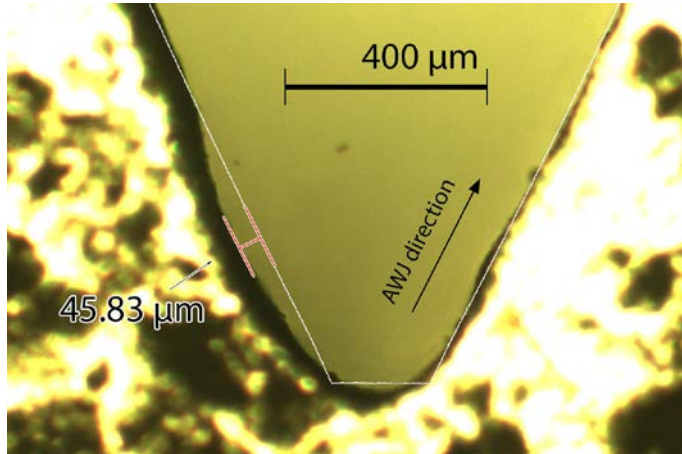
Figure G. Bottom geometry, inner teeth, no TAC, gear A
